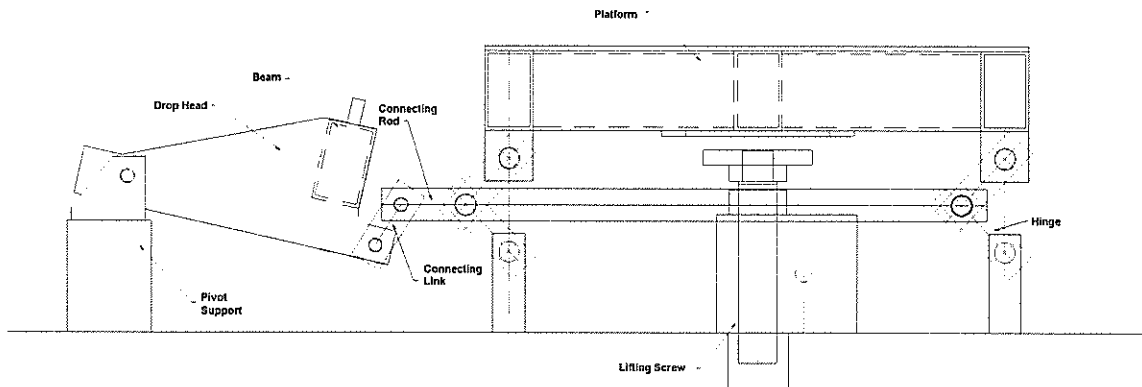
Elevation view of dropper mechanism in drive-on or lowered position.
